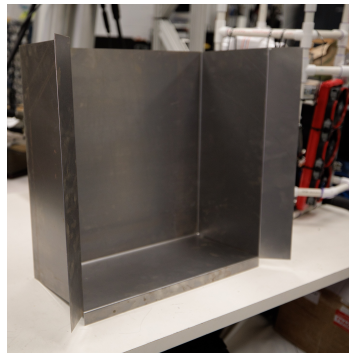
Bent sheet metal seat back - will be installed in a welded structure
